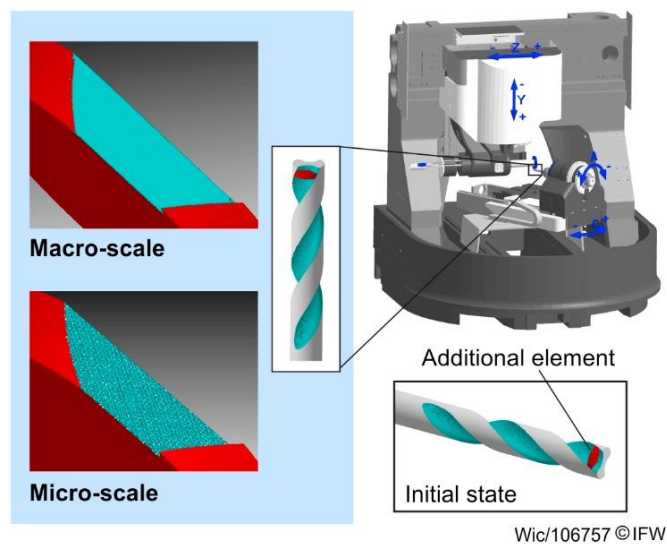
Concept of multi-scale material removal simulation for tool grinding
